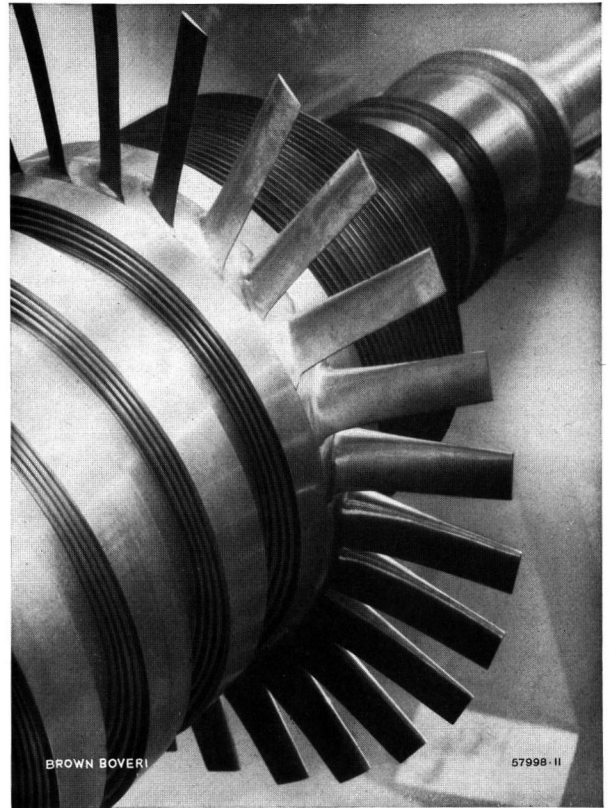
Experimental turbine (hot air turbine) for testing blading. The turbine can deliver 500 kW. The view shows the rotor after blading of the first row. The blades are of aero-foil section.
